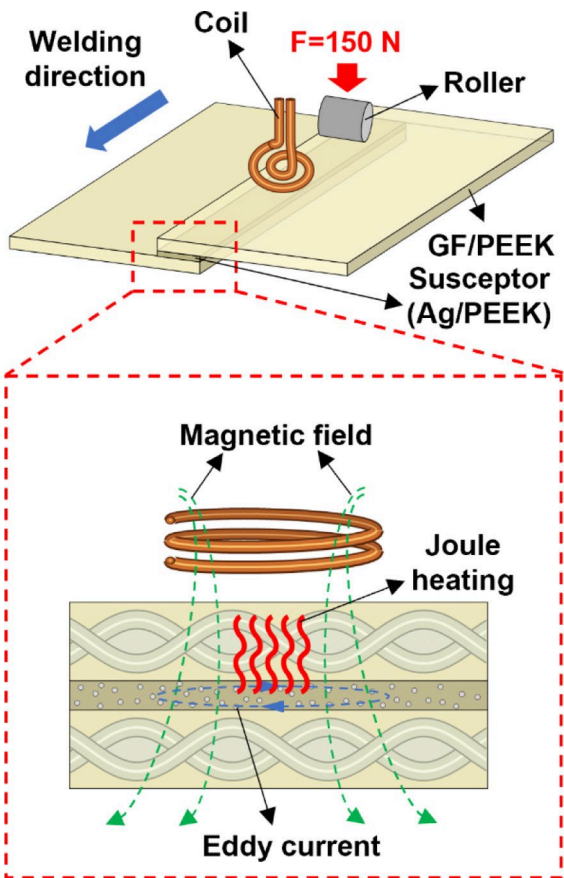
Schematic of the induction welding process and mechanism
